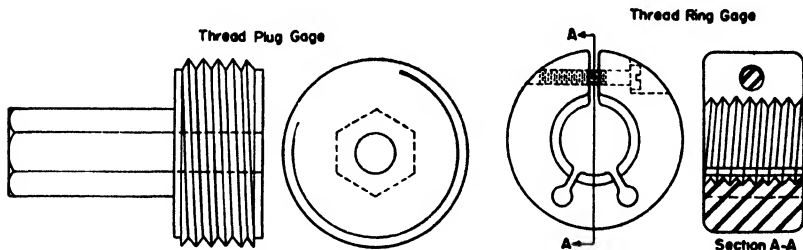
Left is a thread plug gage for internal threads; right is a thread ring gage for external threads.
